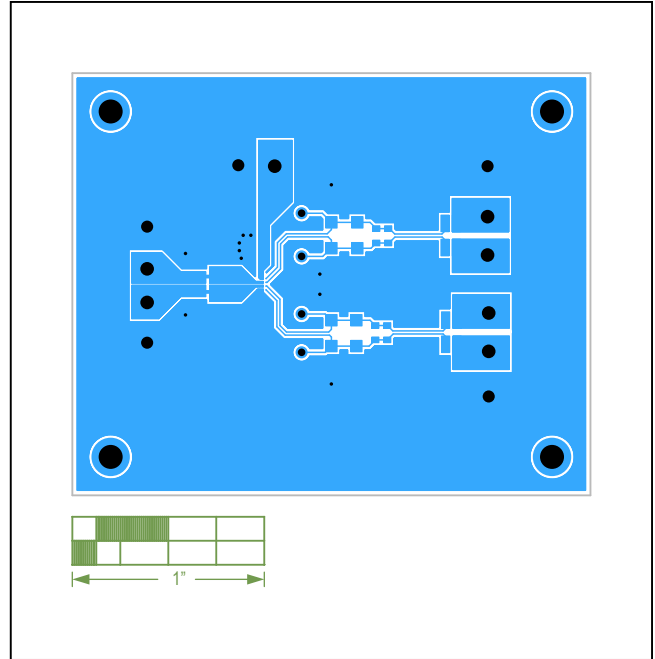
MAX44285 EV Kit PCB Layout—Component Side
